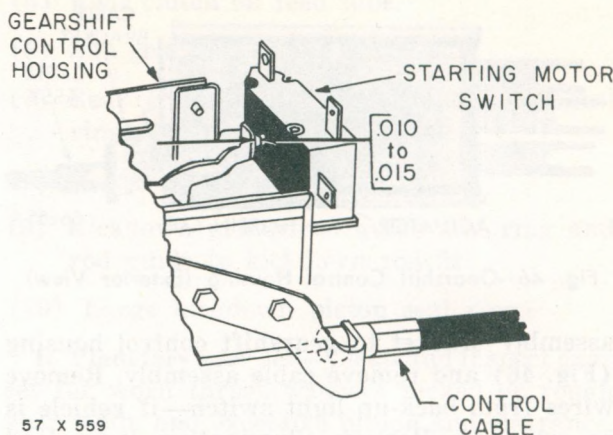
Push Button Operating Slide to Starting Motor Switch Clearance
